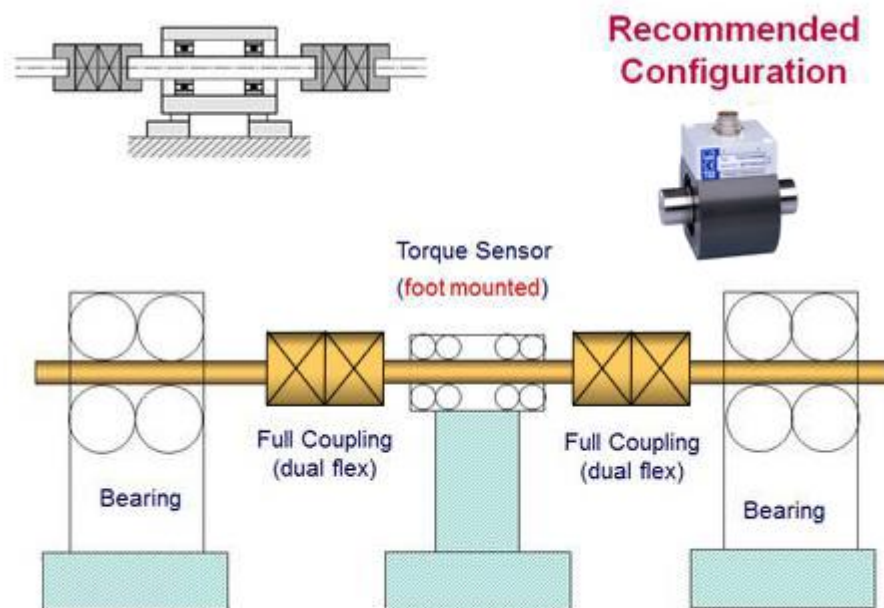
A foot-mounted slip-ring (rotary transformer) torque sensor
